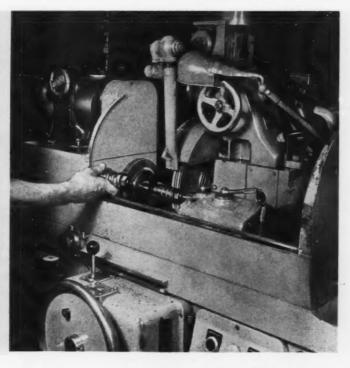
Thread grooves in bores of ball nuts are roughand finish-ground on this machine. Wheel is dressed automatically with two diamonds.
